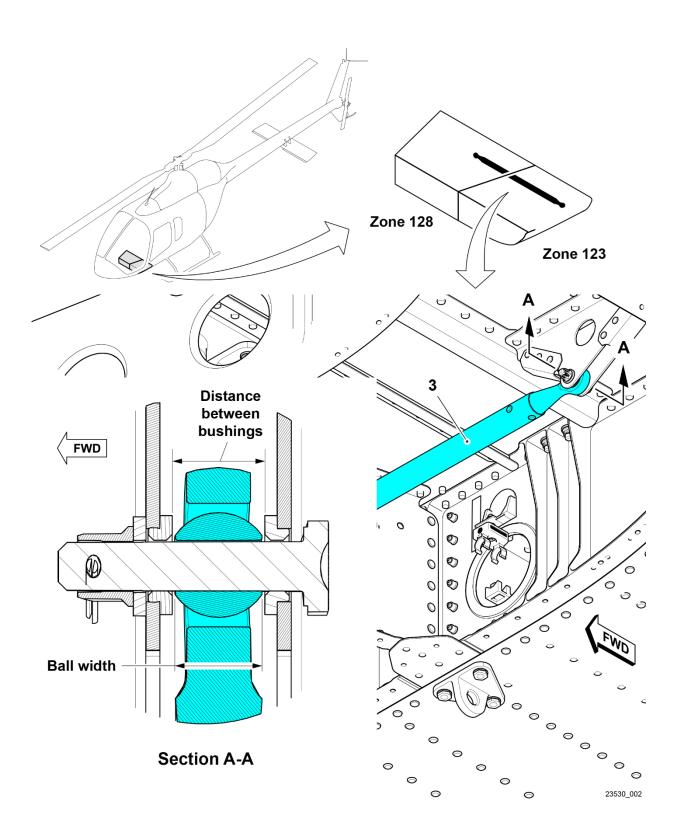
Cyclic Control Tube and Fixed Support Assemblies (sheet 2 of 4)
